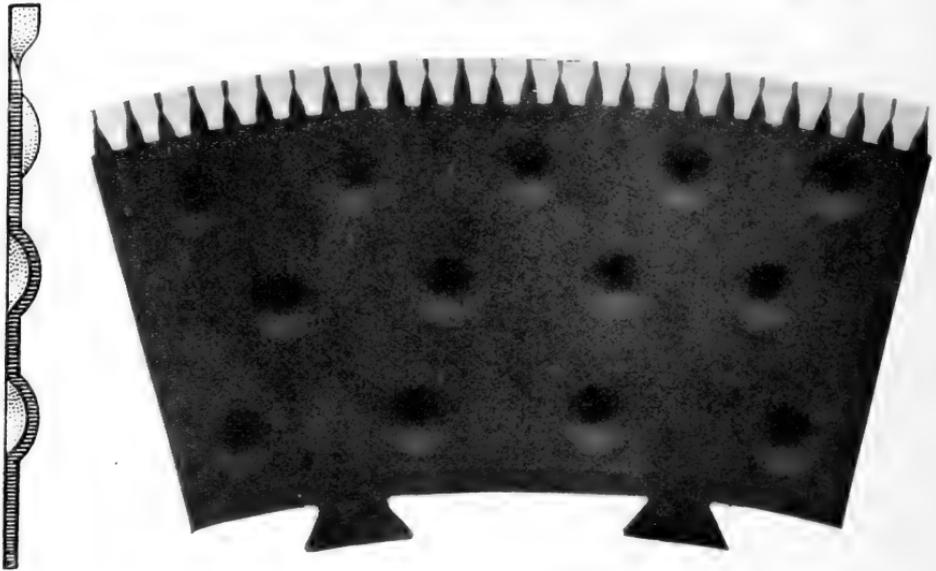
Ventilating Spacing-piece. Dick, Kerr & Co.
